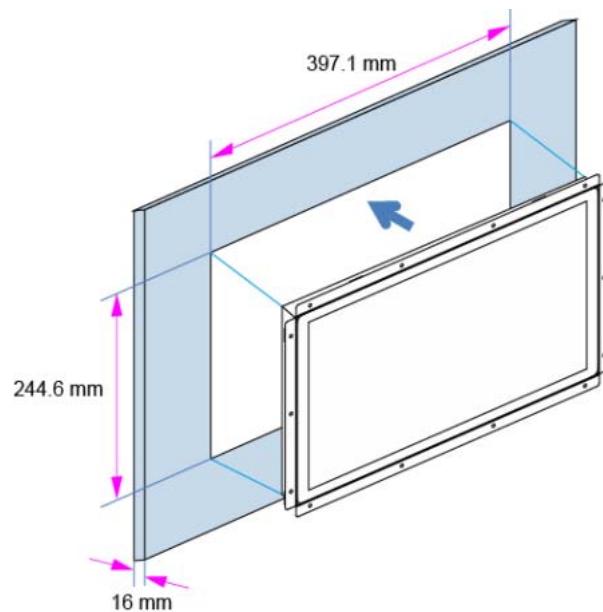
OPC-1562 Panel Mount Cut-out hole and maximum panel thickness
